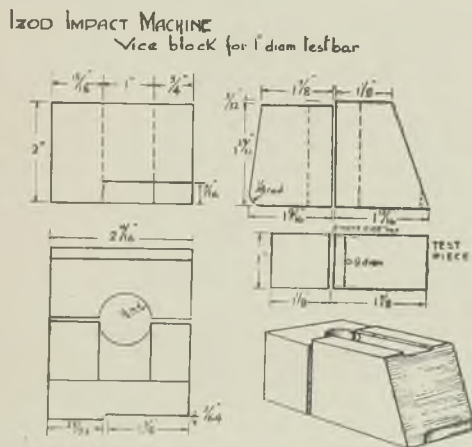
DESIGN OF IMPACT TESTING MACHINE USED.
